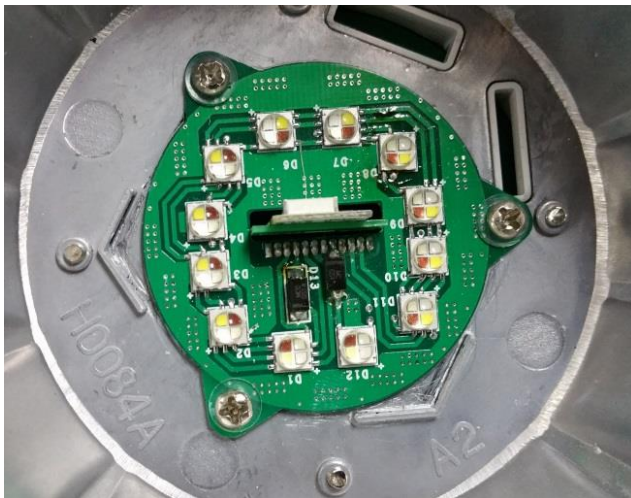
RGBW Light Engine Mounted on the Downlight Housing / Heat Sink.
